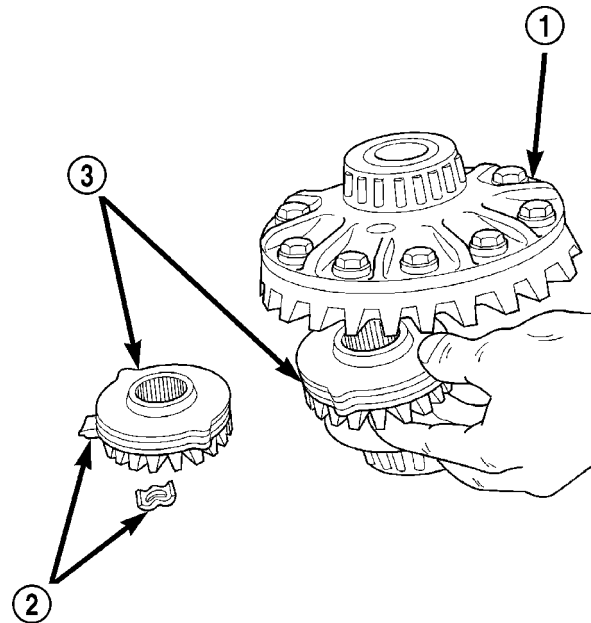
SIDE GEARS AND CLUTCH DISCS
